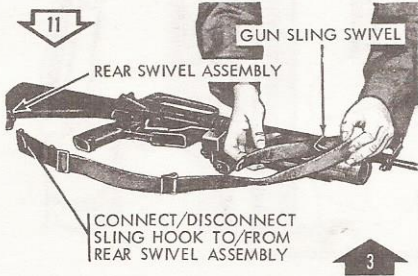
Installation and Removal of Grenade Launcher. (Page 2 of 3).
